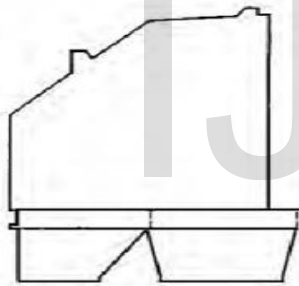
Fixed high speed drive which rotates the magnetic rotor Assembly.
